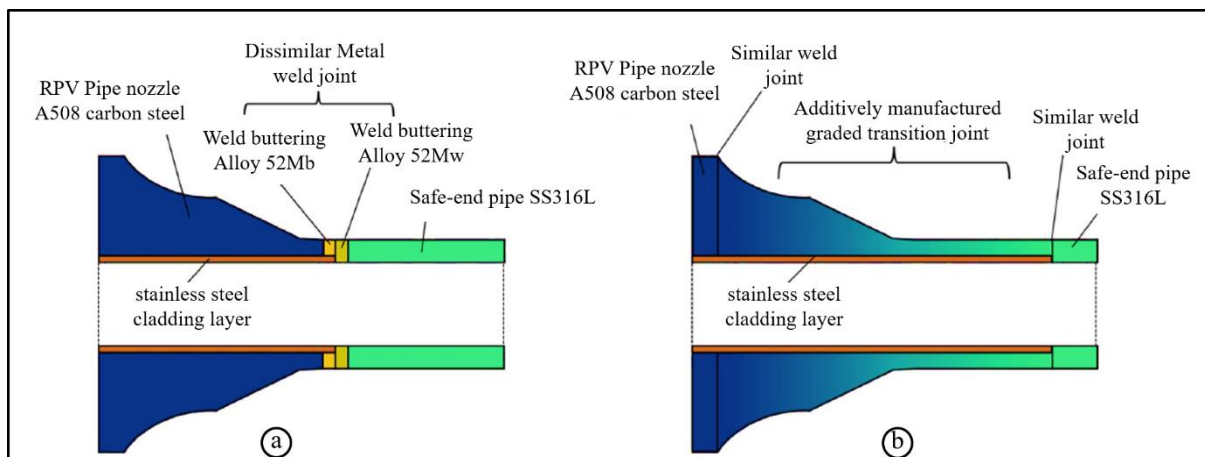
Schematic cross sectional view showing (a) conventionally designed dissimilar metal welded joining, and (b) functionally graded additively manufactured joint [66]
